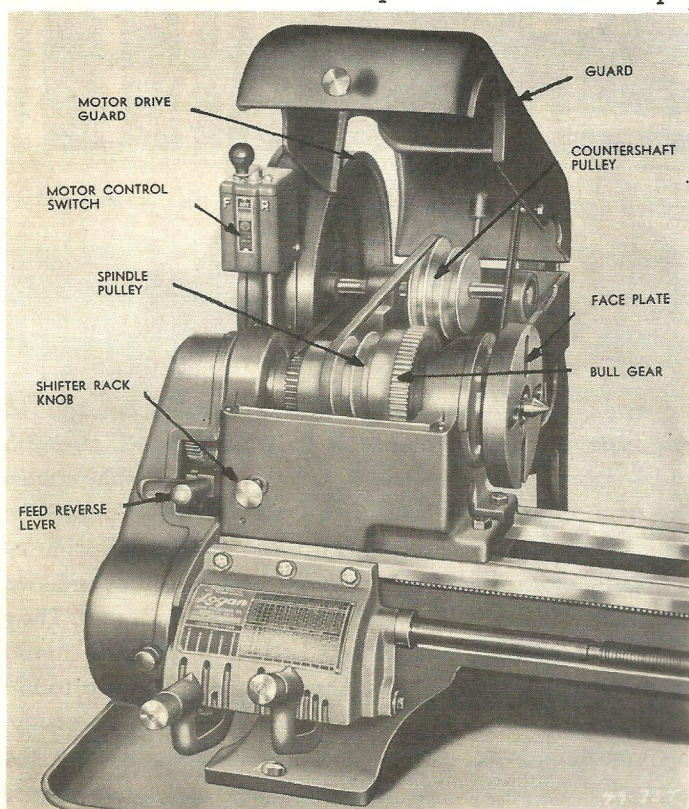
HEADSTOCK AND COUNTERSHAFT
